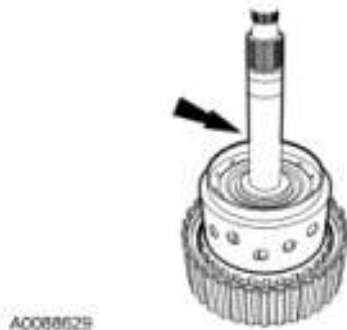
Locating Forward Clutch And Sun Shaft Assembly
